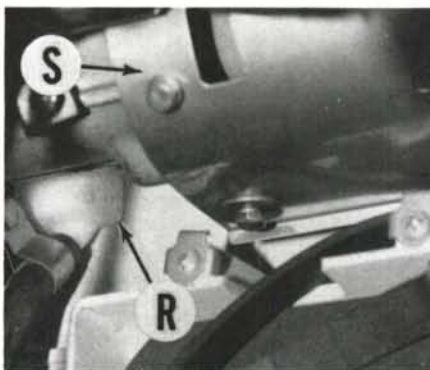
View identifies drive coupler shield (S) and location of bilge strainer (R).
